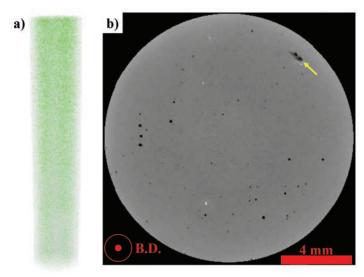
(a) 3D reconstruction of the as-built pillar with pores segmented in green and (b) a 2D horizontal slice of the as-built piece showing the pores in 2D. The yellow arrow indicates a lack-of-fusion defect. (Credit: ORNL).
